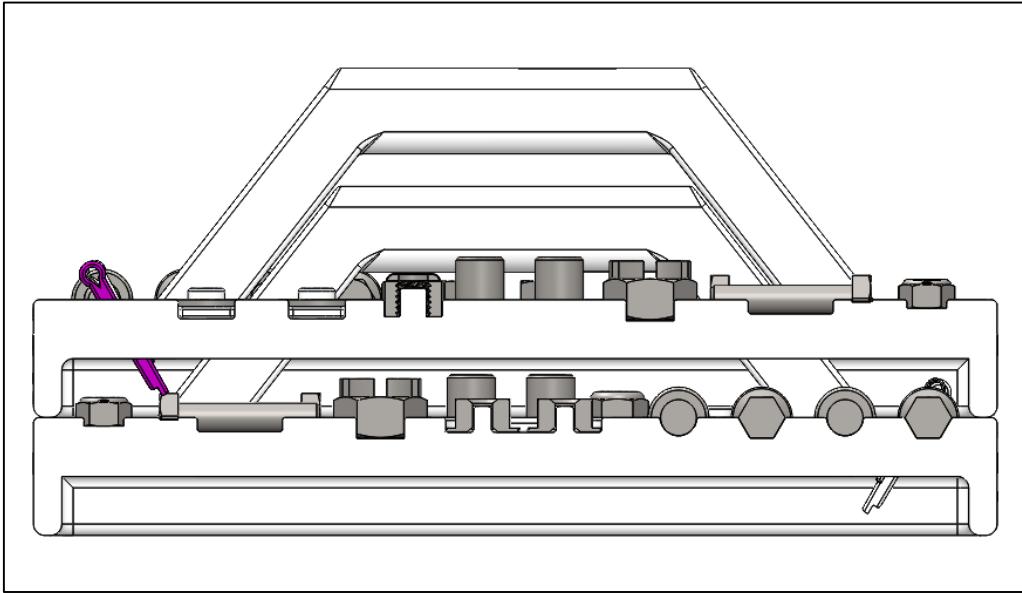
Interference between large cotter pins and steering shaft bolts if fixtures are stacked in reverse [74].
